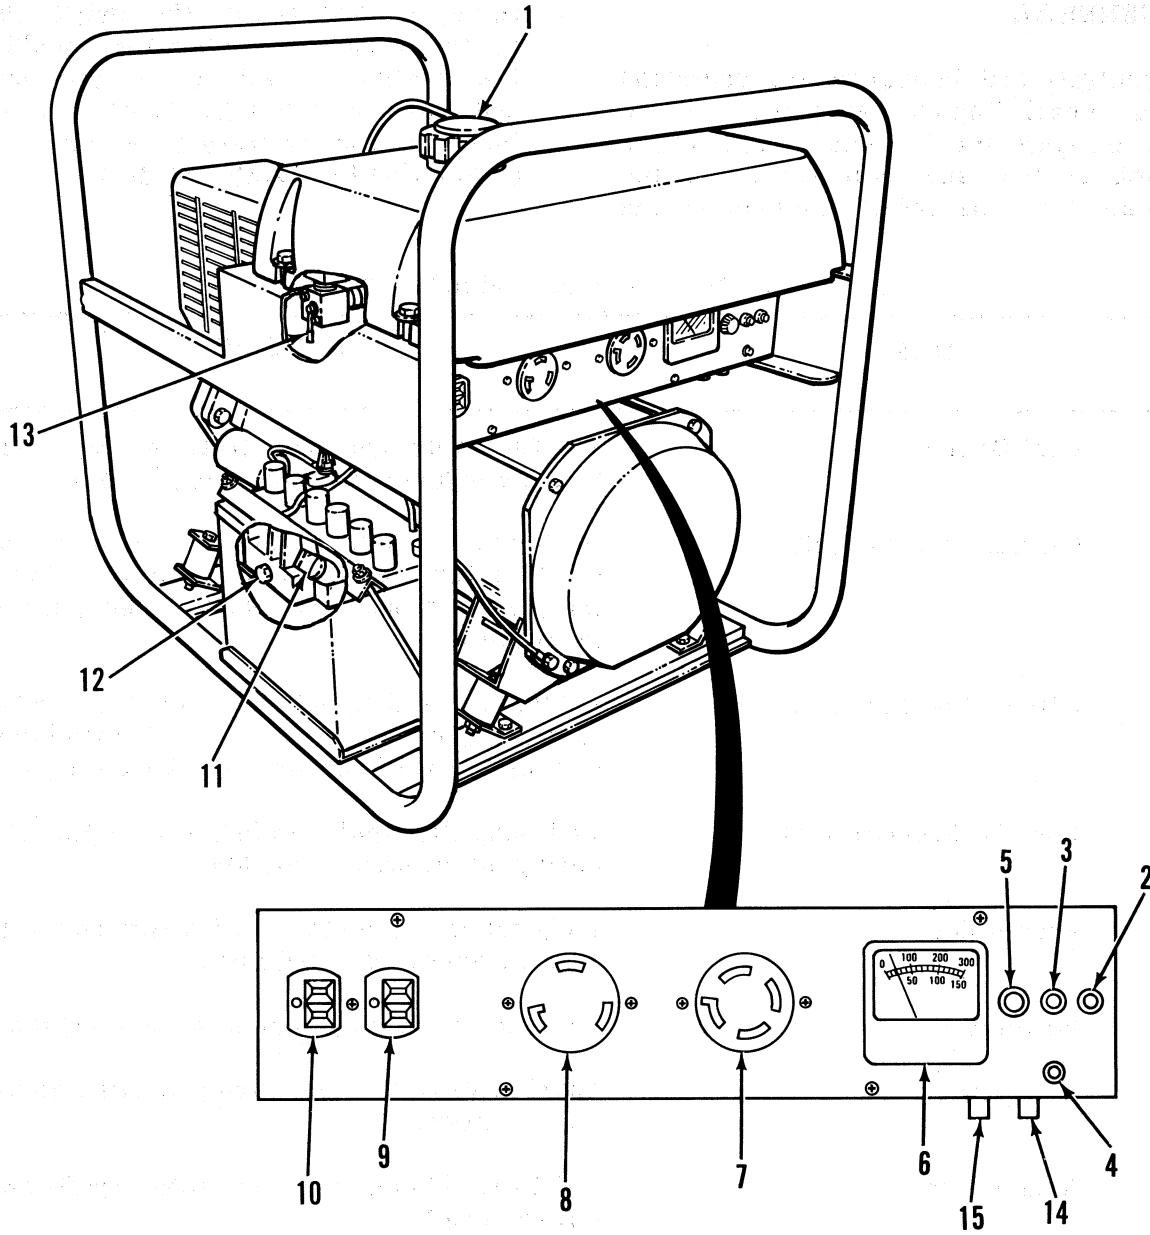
Controls and Indicators (Sheet 1 of 2)
